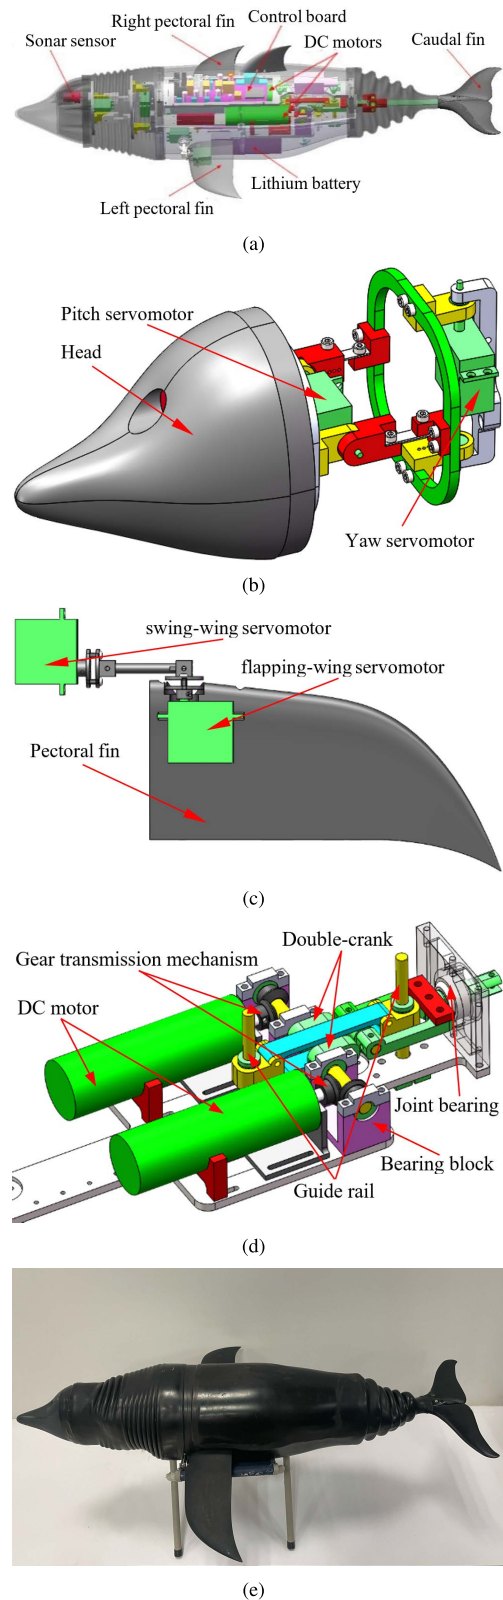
Mechanical design of the robotic dolphin. (a) Conceptual design. (b) Head mechanism. (c) Pectoral fin. (d) Motor driving device. (e) Robotic dolphin prototype.
